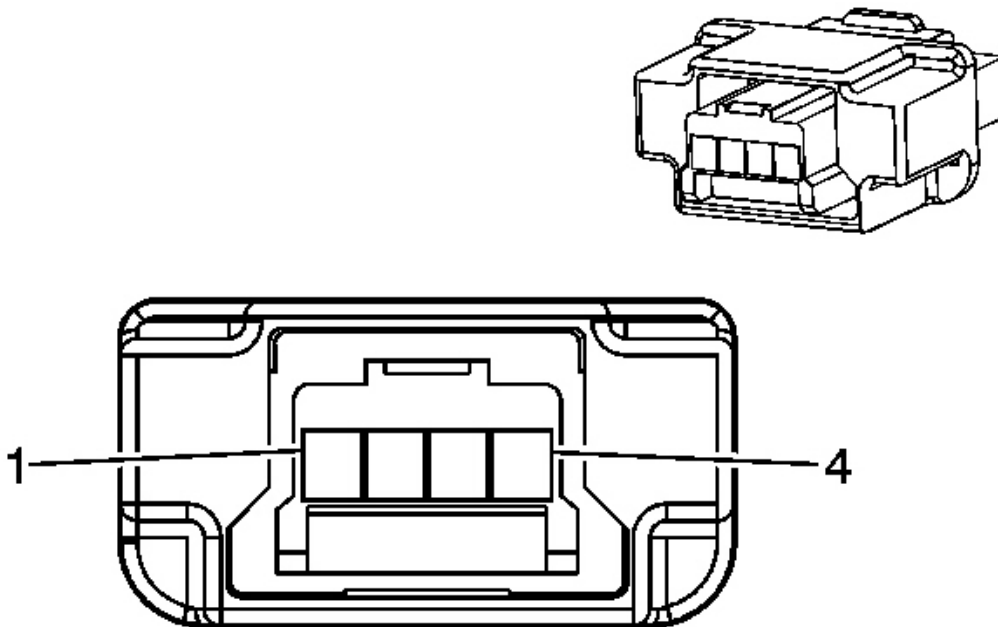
Inflatable Restraint Roof Rail Module - Right (ASF) Connector End Views
